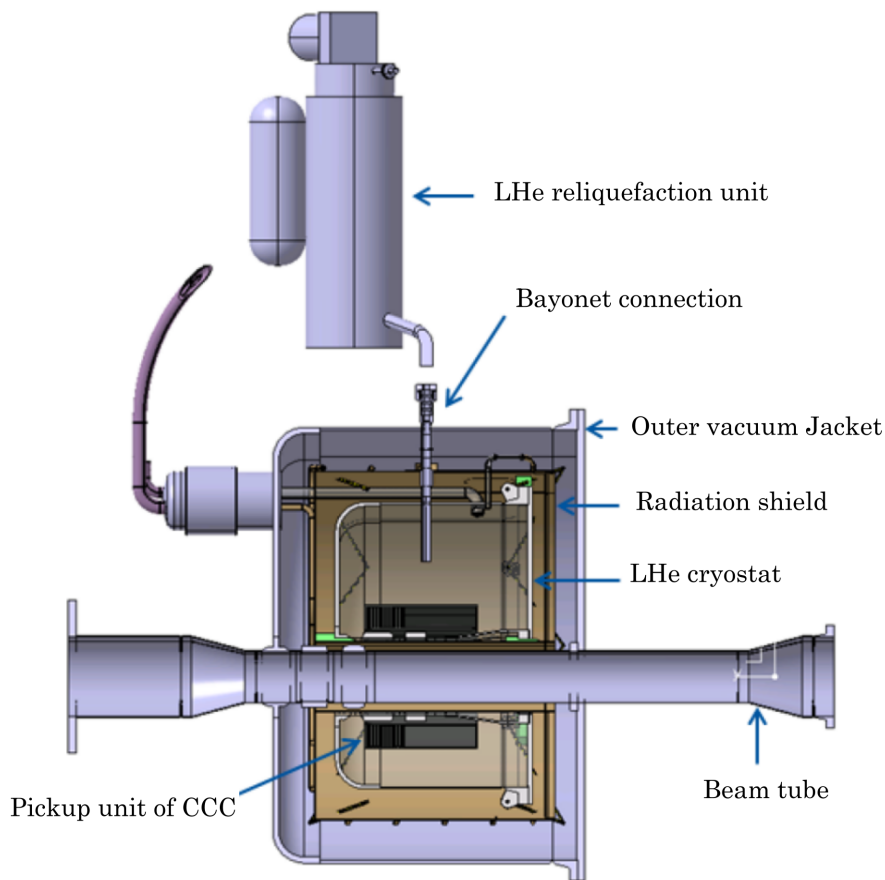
Cross-sectional view of the CCC system installed in the AD machine at CERN. Figure Courtesy, [98]
